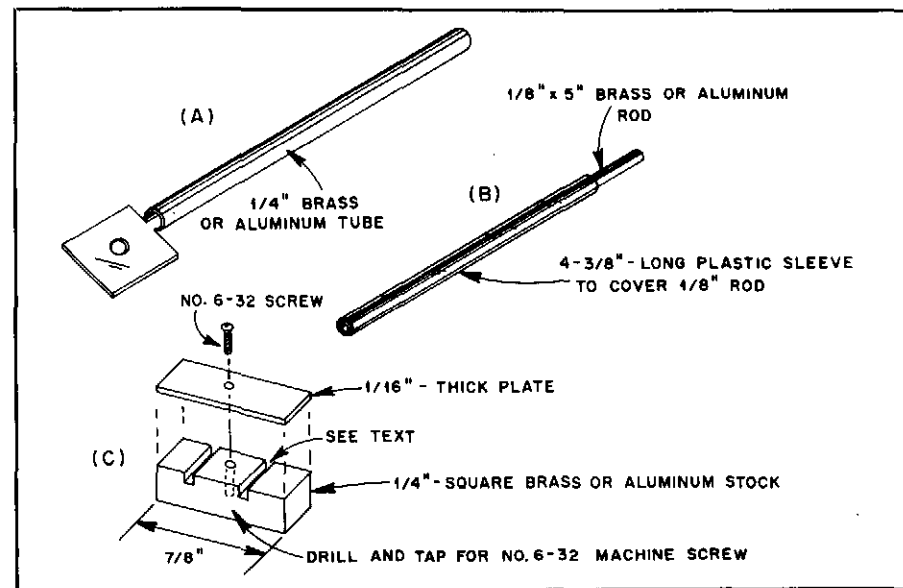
The matching system consists of an outer tube (A), inner rod with insulating sleeve (B) and rod-to-element clamp (C).
